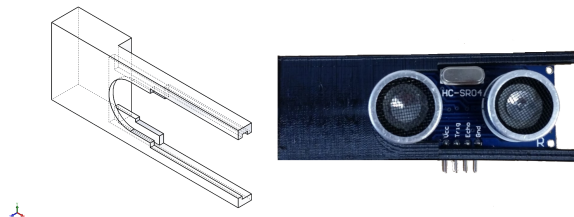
The left part shows the sketch of the mounting bracket, whereas the right part shows the 3D printed part equipped with an ultrasonic sensor of type HC-SR04
